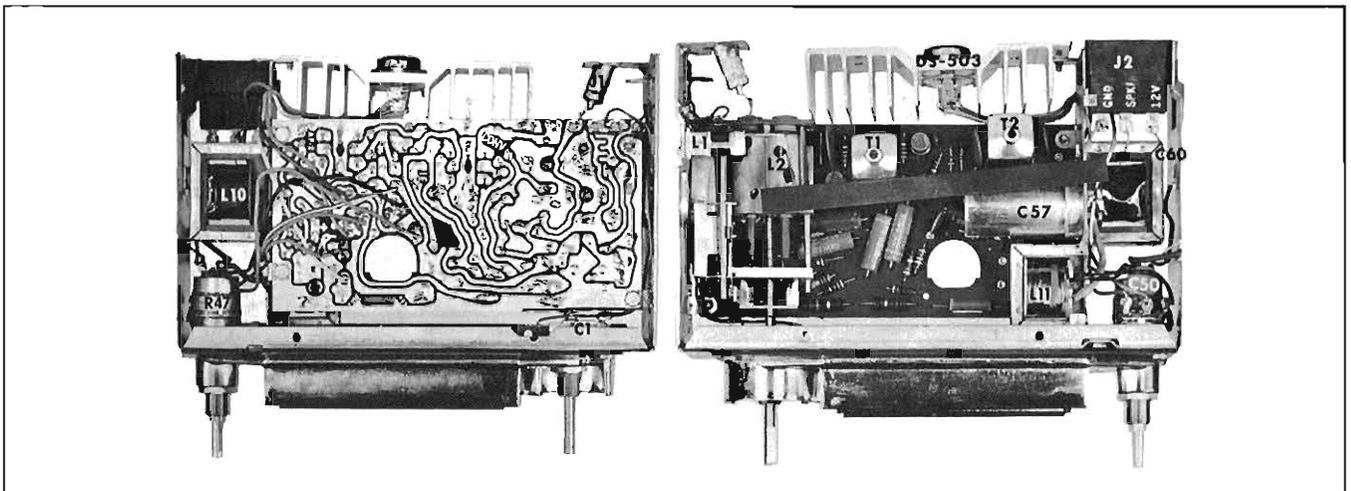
CHEVY II - PARTS LAYOUT CIRCUIT BOARD VIEW - 986248 - RADIO
